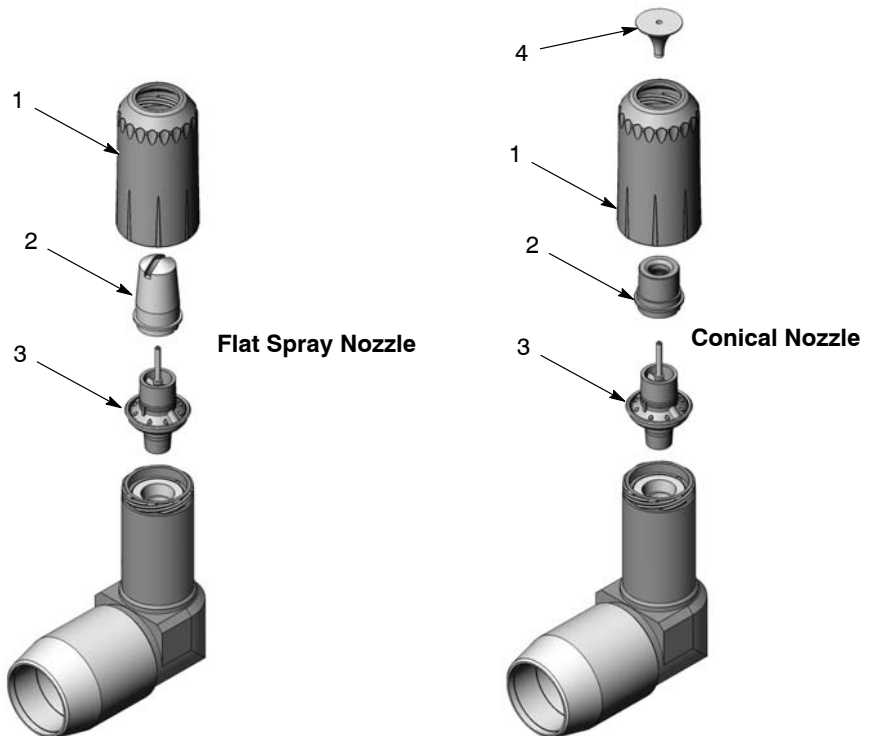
Installing Electrode Holder and Nozzle on the Extension
